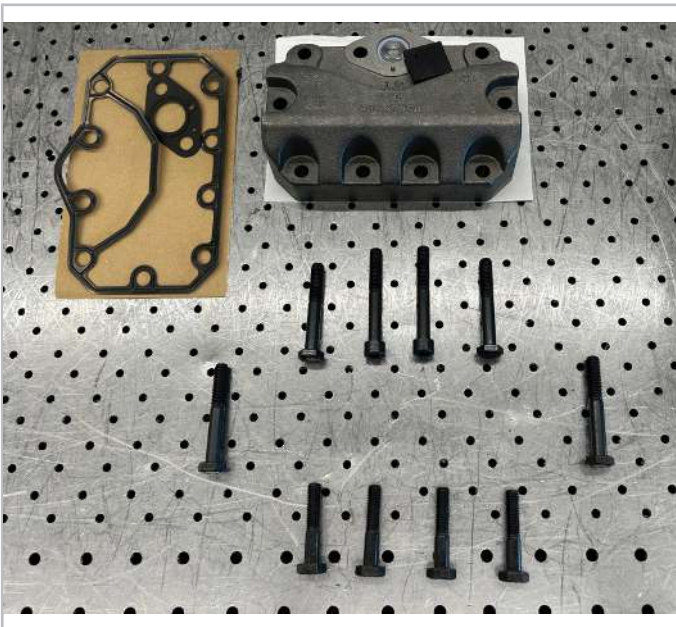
CR11 cylinder head for compressors 4VES .. 4NES
